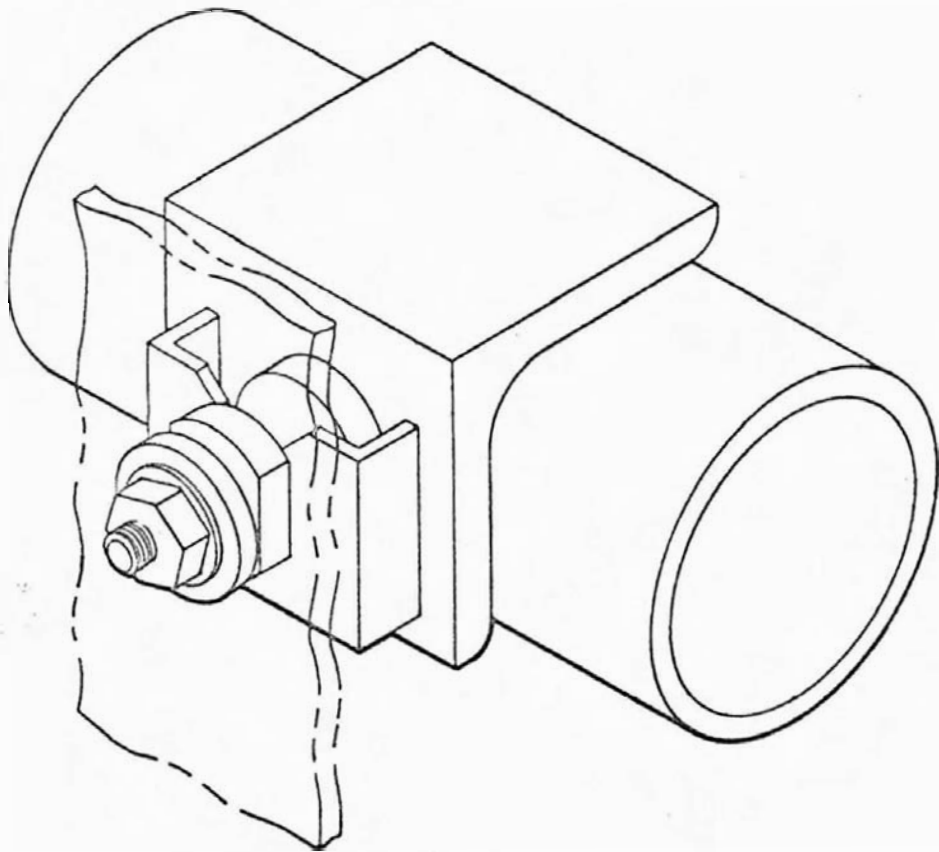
Special Bolts of Holding Fixture HF-335-18100
